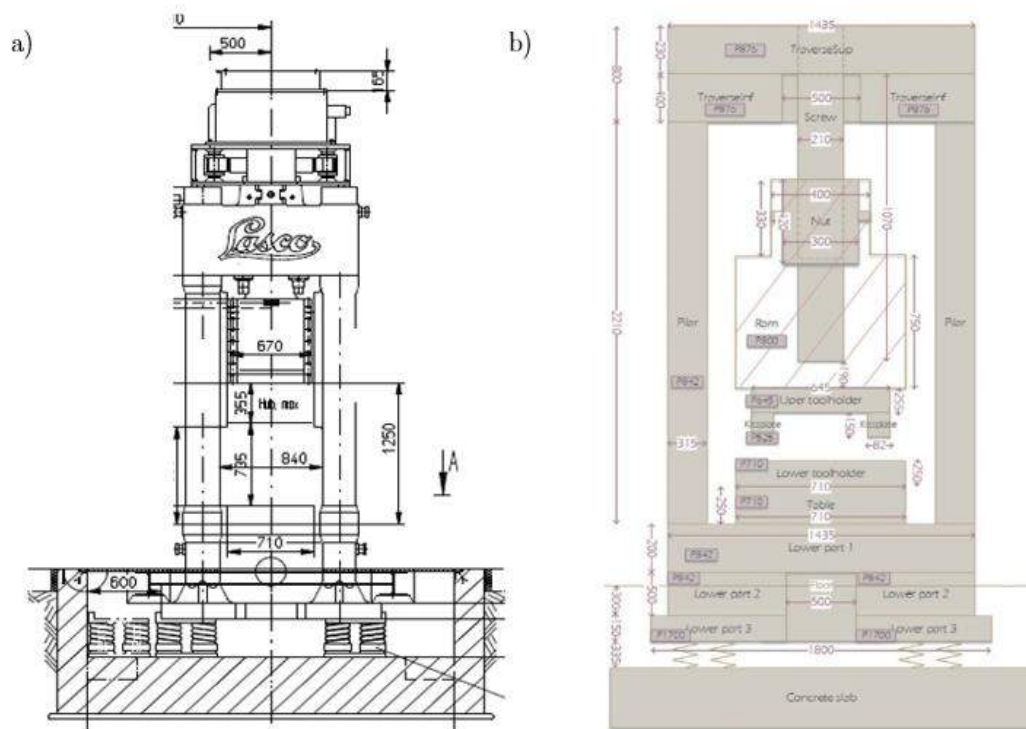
a) Face view of the screw press LASCO SPR400 b) Screw press blueprint with geometrical approximations
